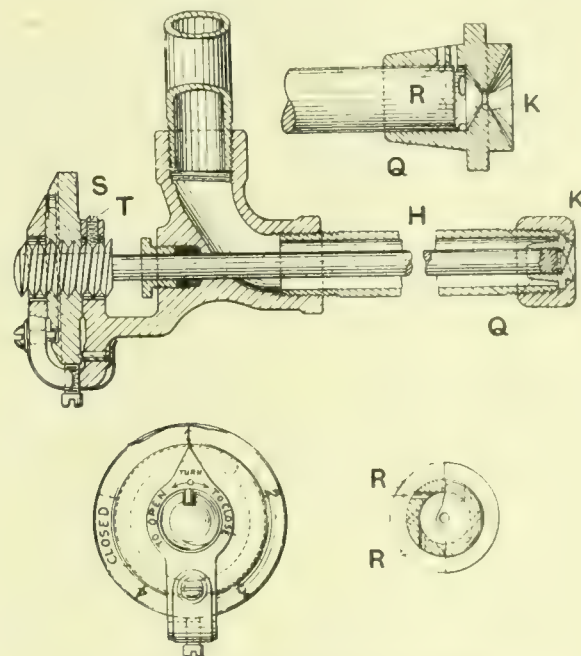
BABCOCK &amp; WILCOX OIL BURNERS.
